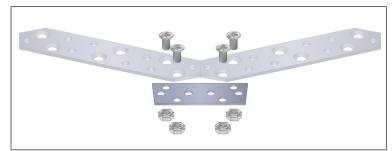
Figure C. Use the Corner Mending Plate Set to hold the top mounting plates together.
